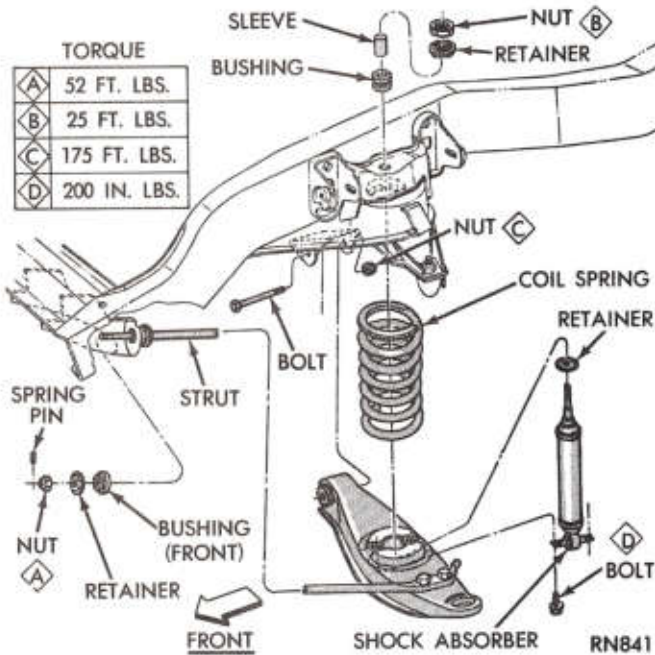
Spring and Shock Absorber (Independent Front Suspension)
